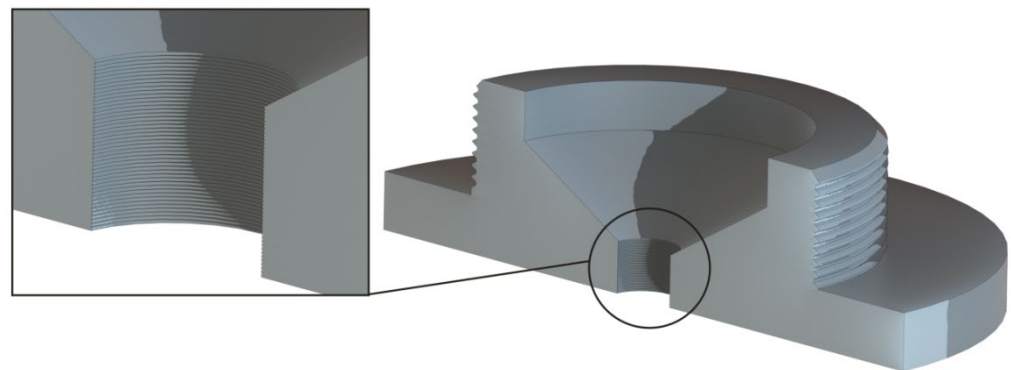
Three-dimensional model of the gripper flange with layer geometry after 3D printing.
